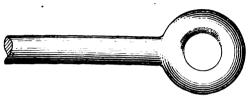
After being Swaged by the Tool Shown in Fig. 1.
